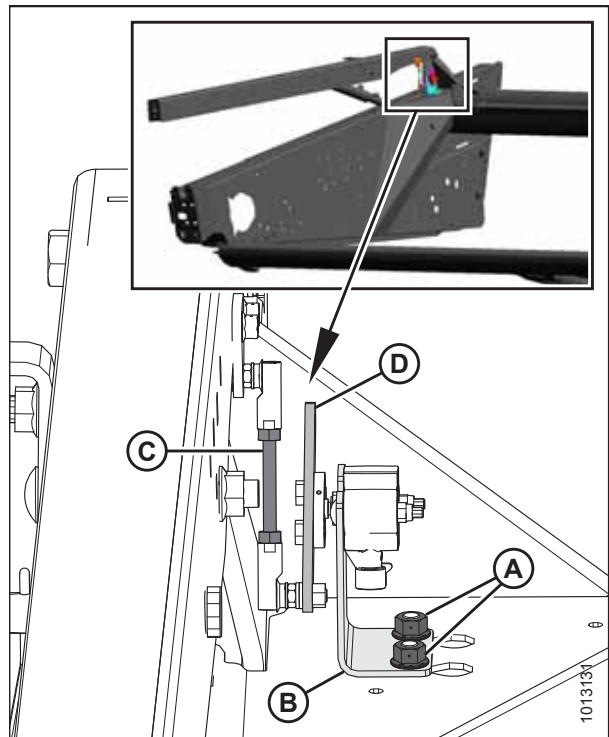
Reel Height Sensor – Front View of Right Reel Arm
